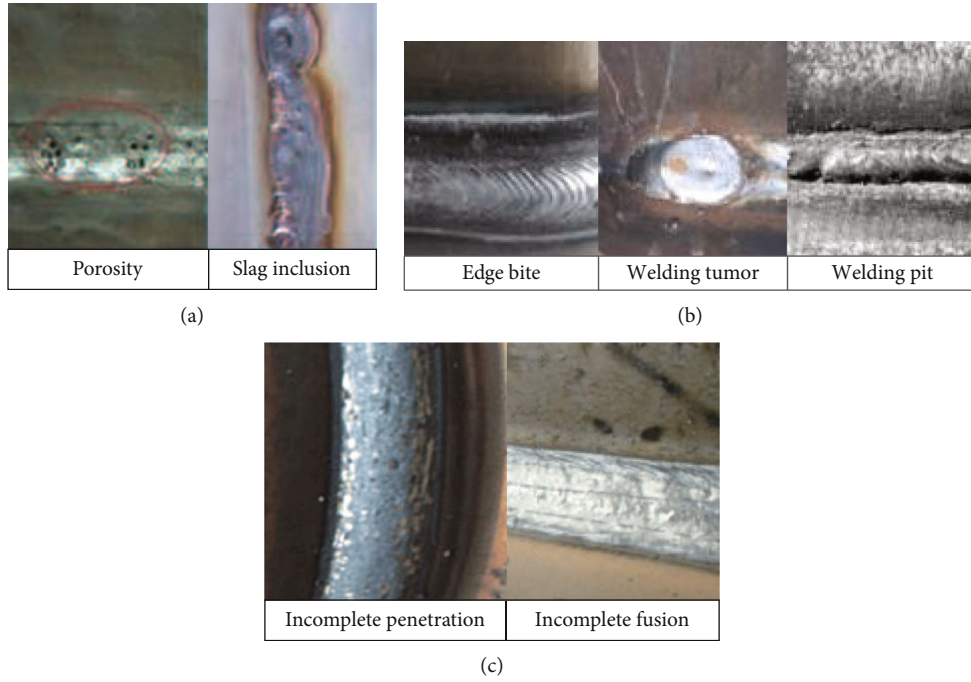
Defects of ship surface welding quality: (a) bulk defects; (b) surface defects; (c) linear defects.
